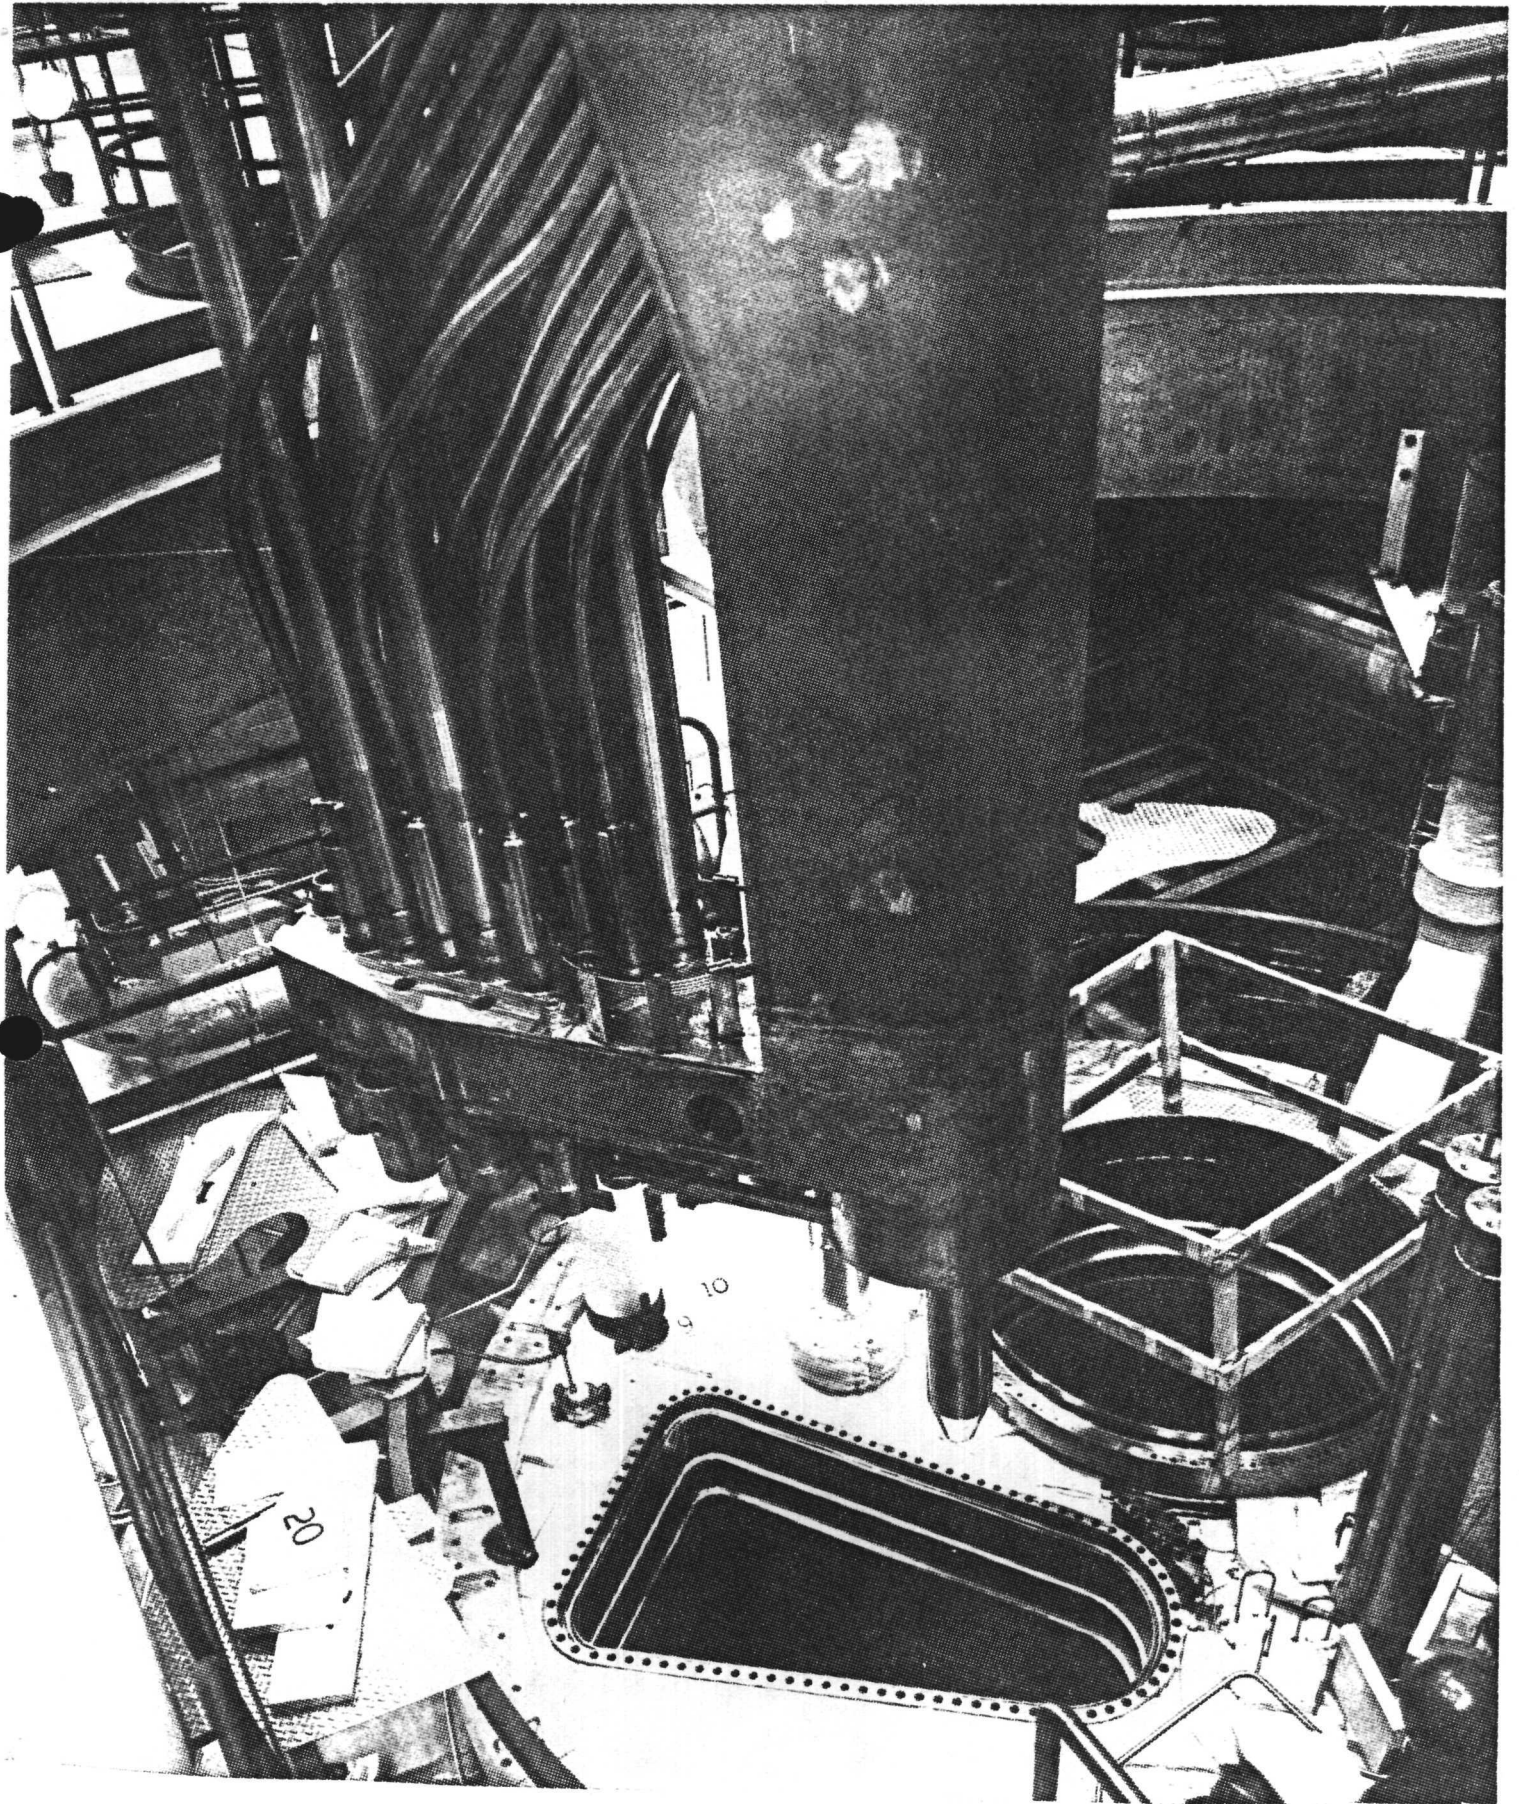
View of the Bottom of the Instrument Tree Showing the Weldment That is Difficult To Drain Due to the Configuration.
